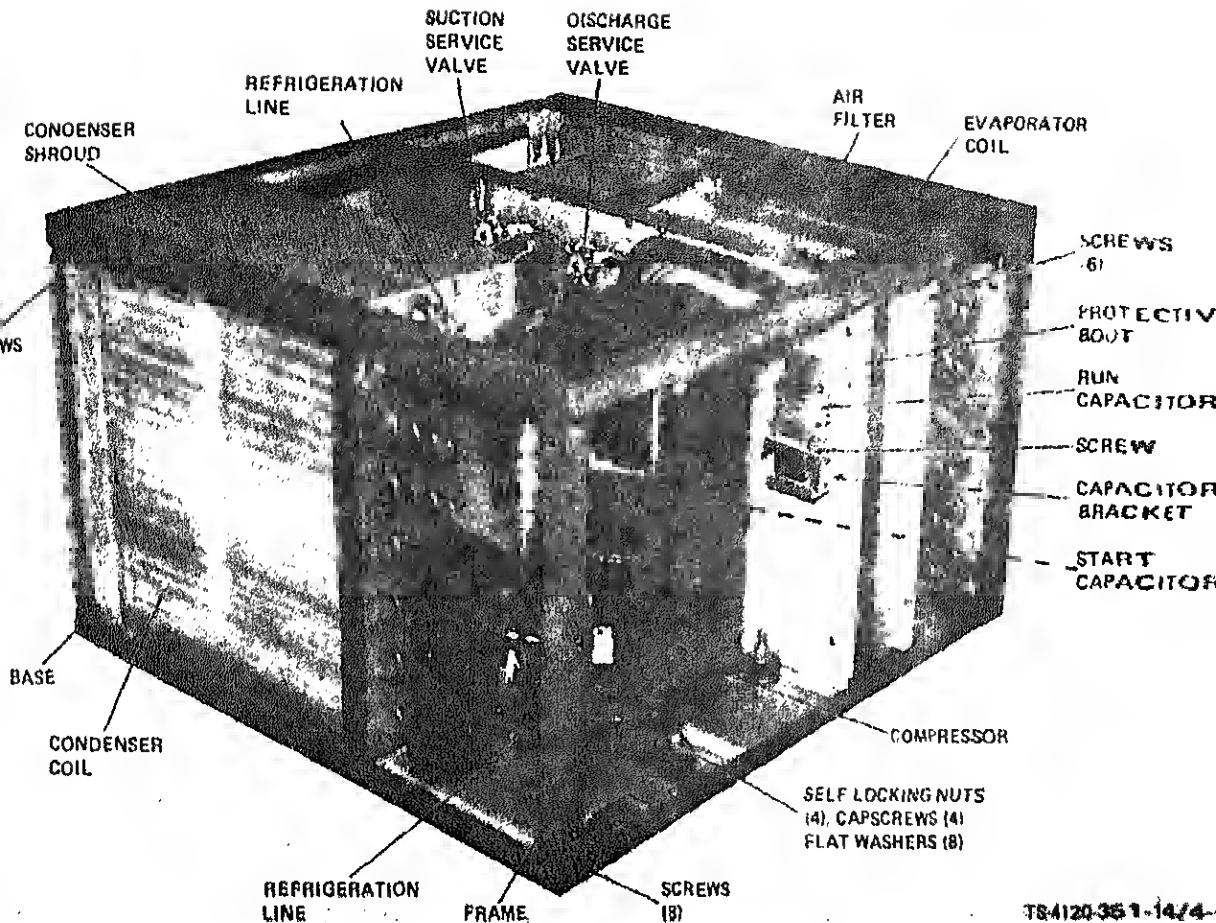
Service valves, capacitor, compressor, receiver, and liquid-moisture indicator, removal and installation.
